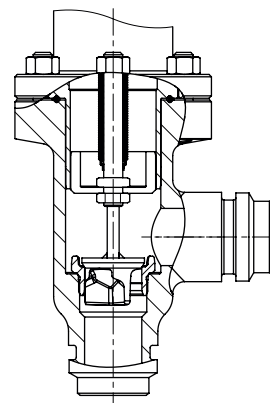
Type 3248 Angle Valve with aluminum body, PN 40
